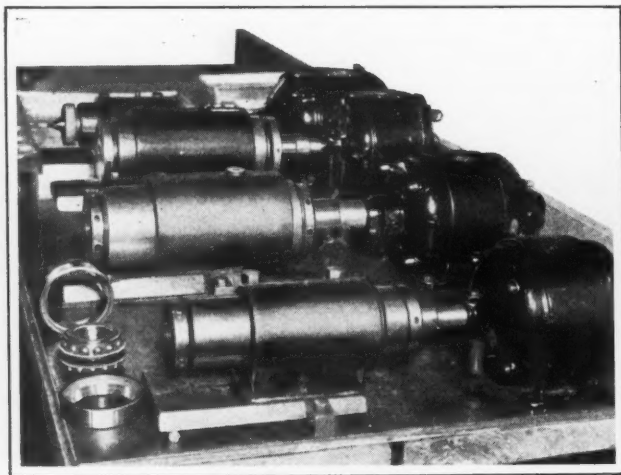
Four Machines Employed in Lapping Ex-Cell-O Ball Bearings to a High Degree of Accuracy
